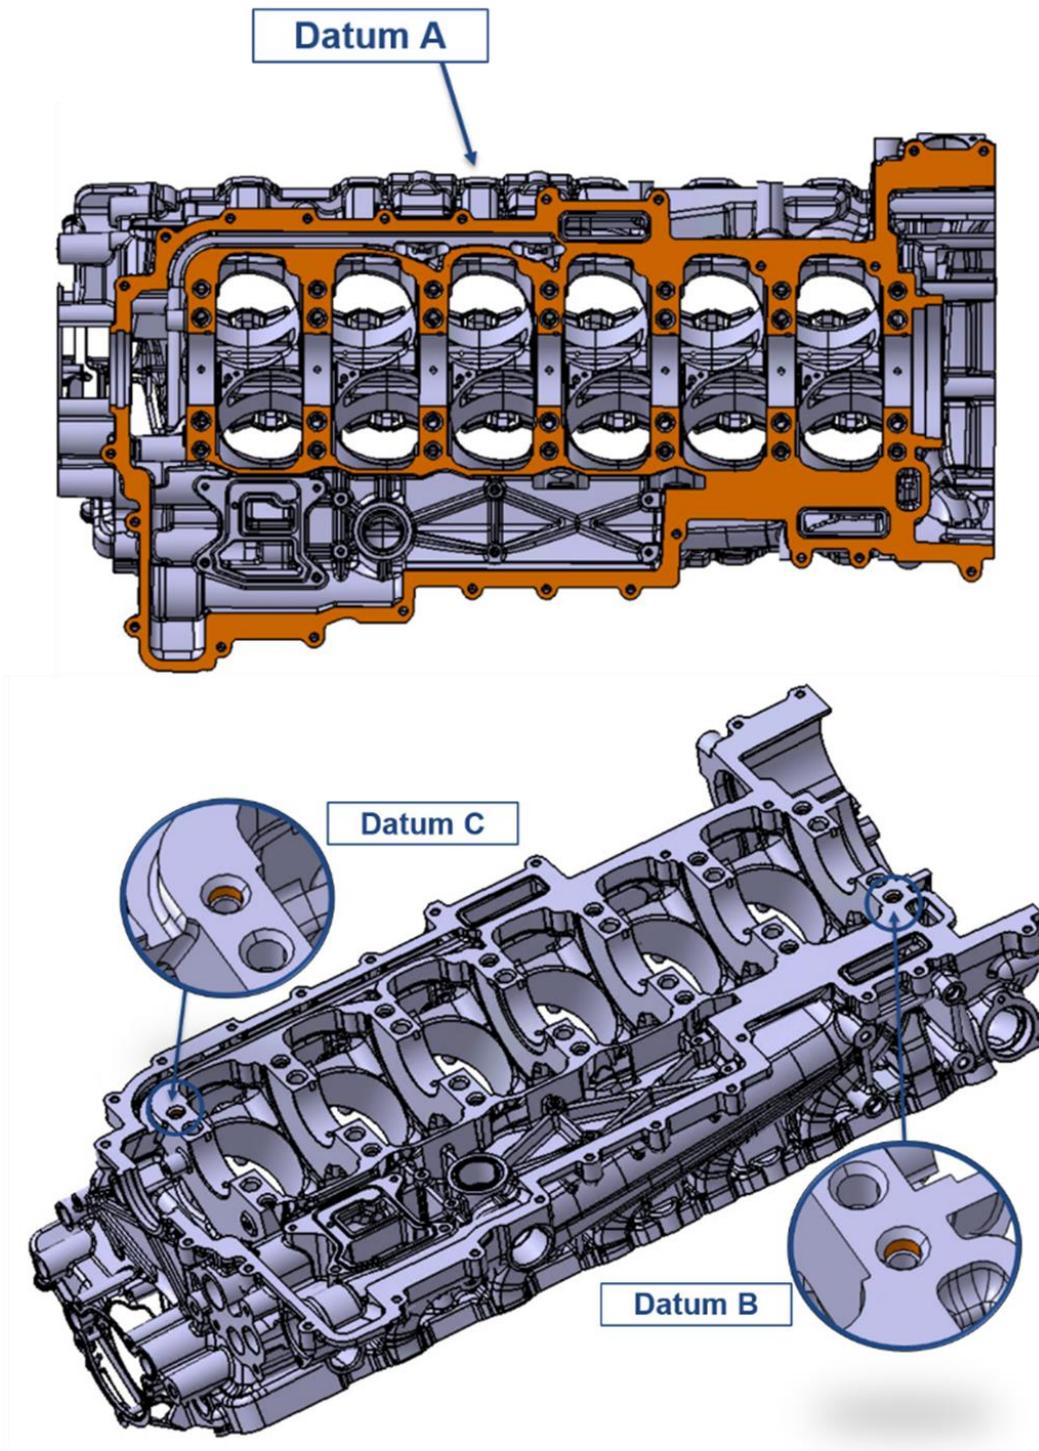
Engine block DRFs: Datum A, Datum B and Datum C
